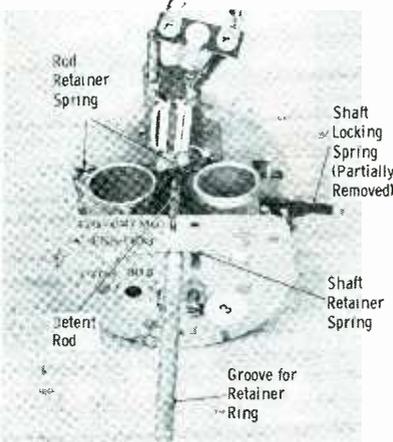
Components which must be loosened or removed to free the coil wheel.
